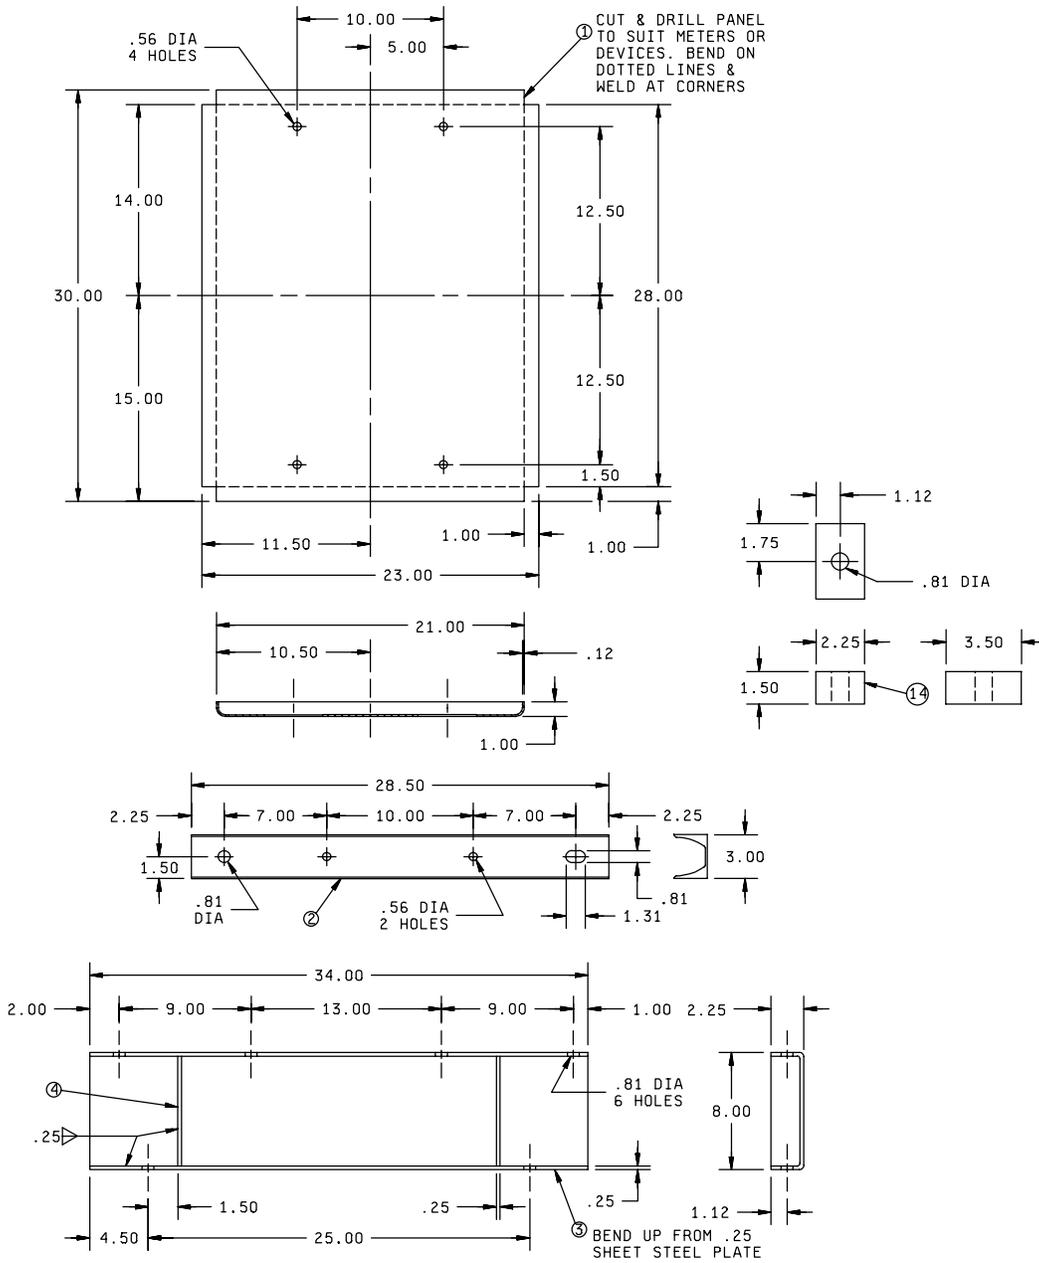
B. Standard mounting fixtures for electrical-indicating switchboard meters and other panel-mounted parts - Continued.
